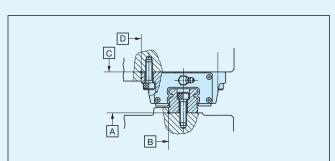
Reference mounting surface and typical mounting structure of Linear Way and Linear Roller Way
